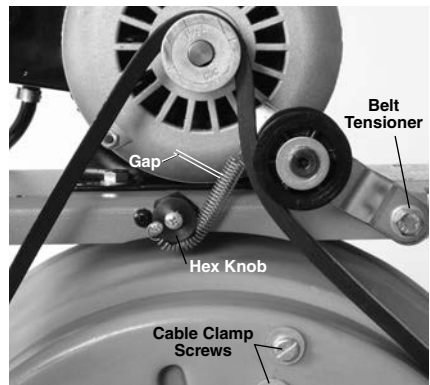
Torque Limiter Adjustment. (Shown With Belt Guard Removed)
